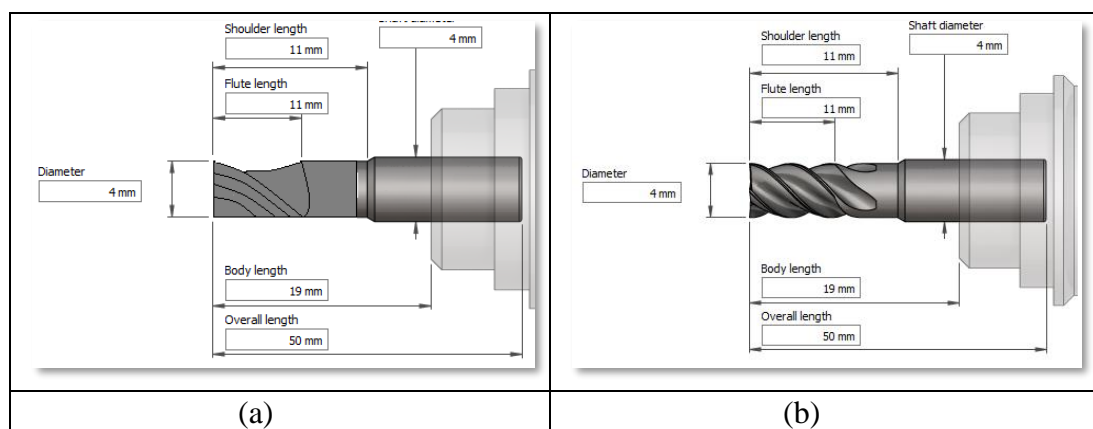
Dimension of (a) Single Flute and (b) Two Flutes End Milling Tool
